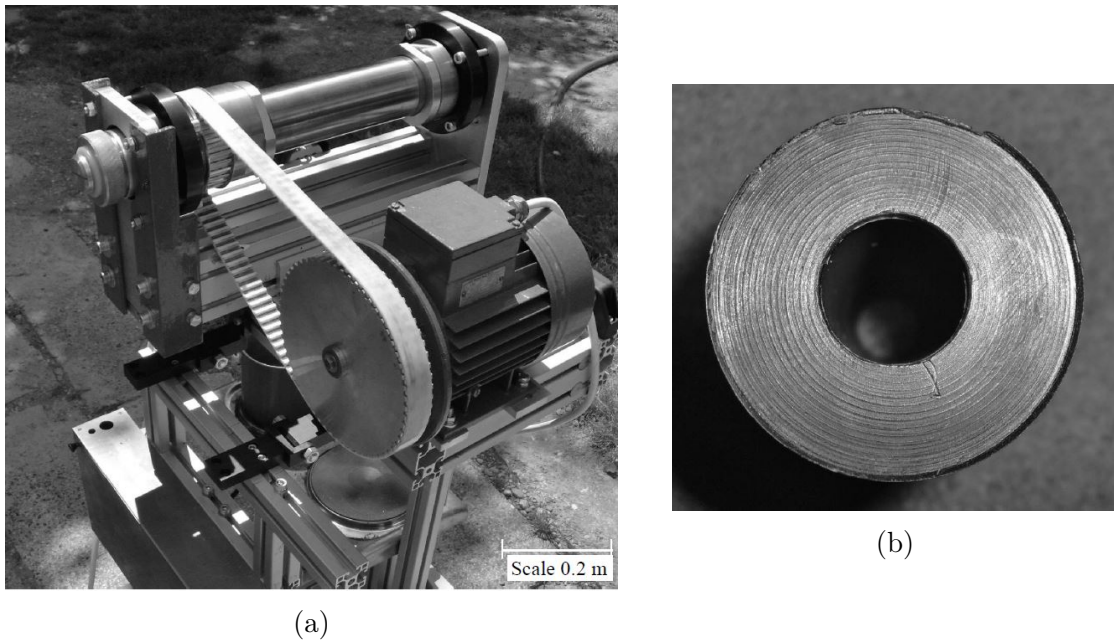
Centrifugal casting machine (a) and manufactured fuel grain (b) [29].
